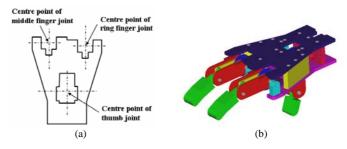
(a) Drawing of palm plate, showing locations of finger and thumb joints, (b) CAD drawing of the palm and fingers.
